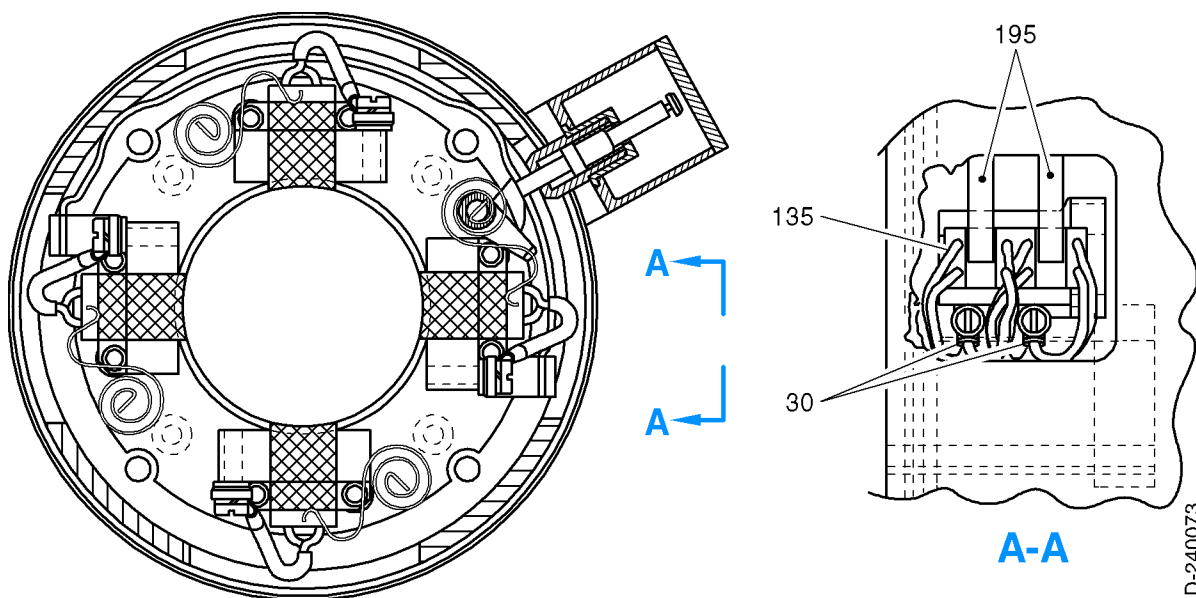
(Sheet 1 of 1) Brush Assembly Installation (GRAPHIC 49-42-02-99B-822-A01)
